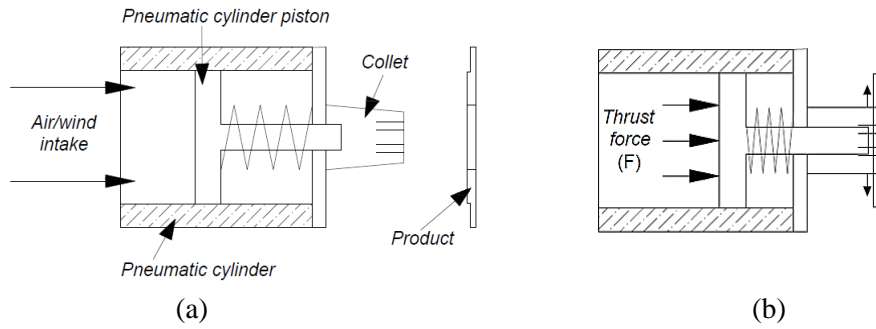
Sketches of (a) The Initial Concept and (b) How Collet Clamping Works
